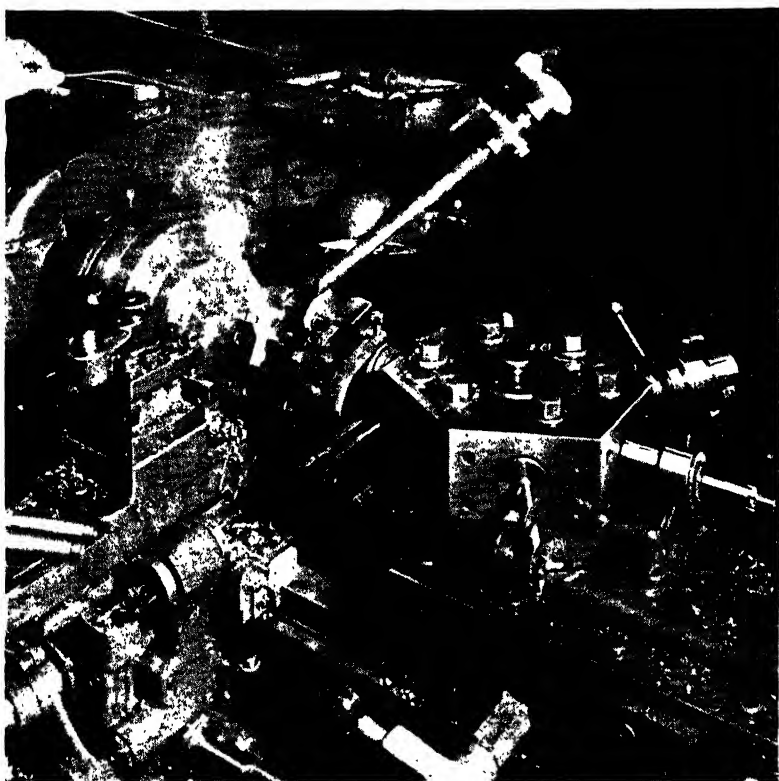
Producing Machine Gun Screws in Turret Lathe
